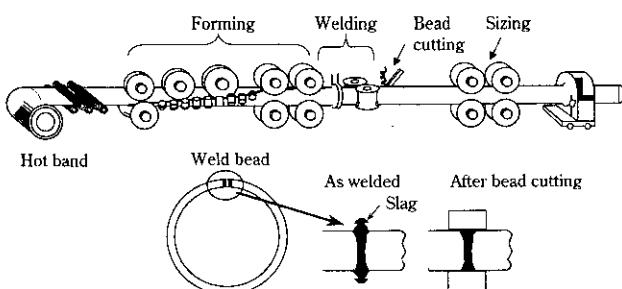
Schematic illustration of bead cutting in electric resistance welding steel tube manufacturing process
